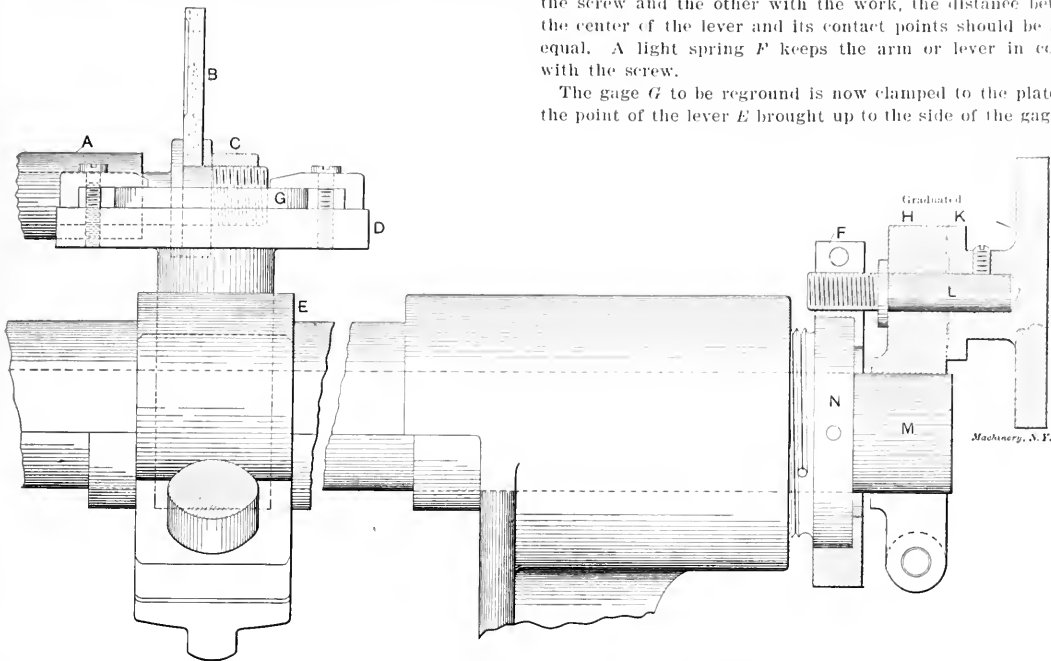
Brown & Sharpe Cutter Grinder arranged to Grind Snap Gages.
